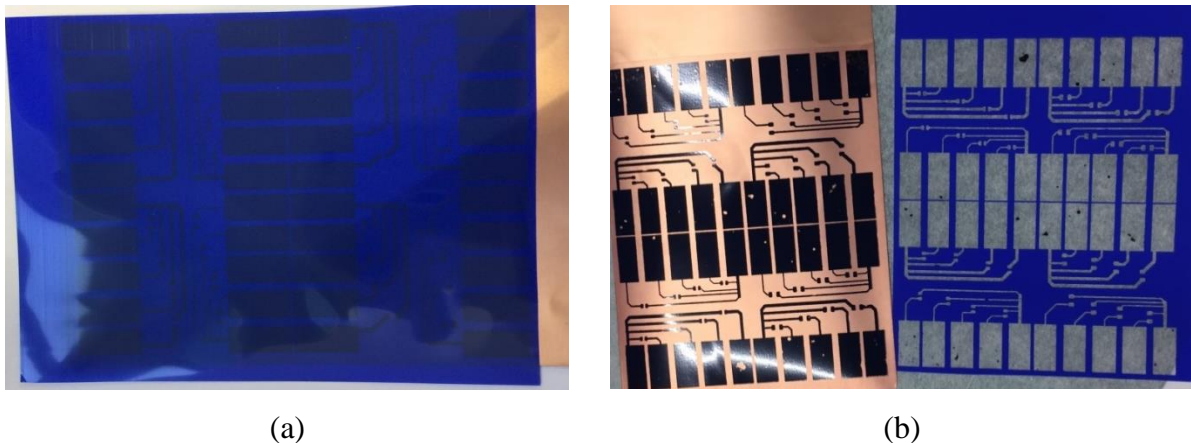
PCB preparation, (a) face to face placement of PNP sheet and copper sheet before the heated press, (b) transfer of design on the copper sheet after heated press
